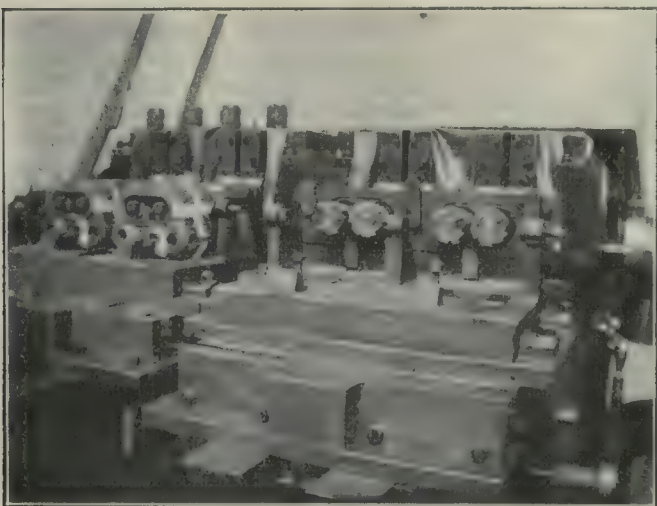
MOTOR CAR ENGINE CYLINDER SET FOR BORING.
